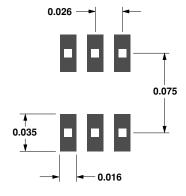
PCB Pad Layout, SOT-363. (dimensions in inches).
